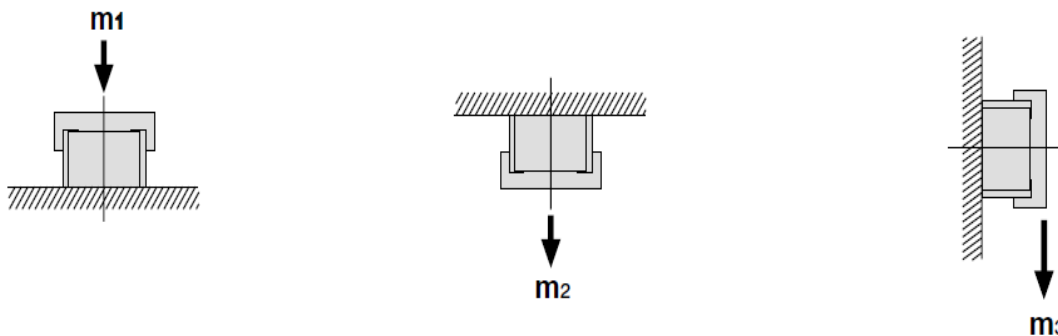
Mounting positions for the MY1B mechanically jointed rodless cylinder [1]
